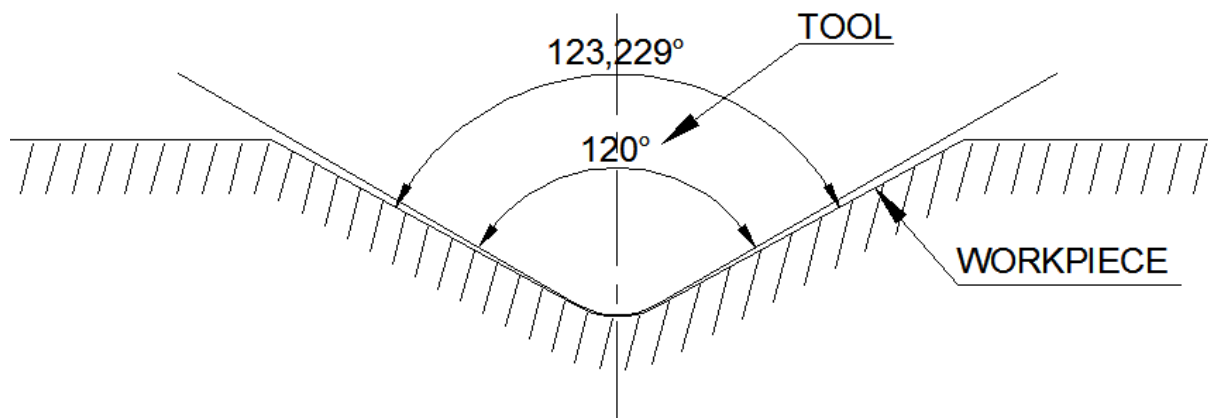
HDS (H11) workpiece after machining with copper tool with different front angle such as 90° and 120°
